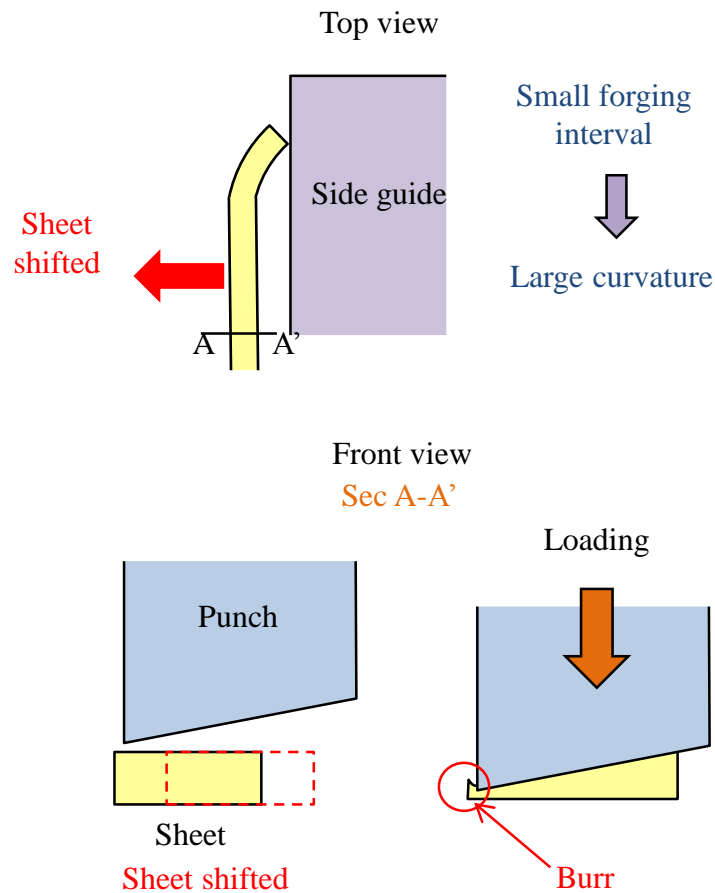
Burr formation on side of stainless steel sheet having inclined cross-section.
